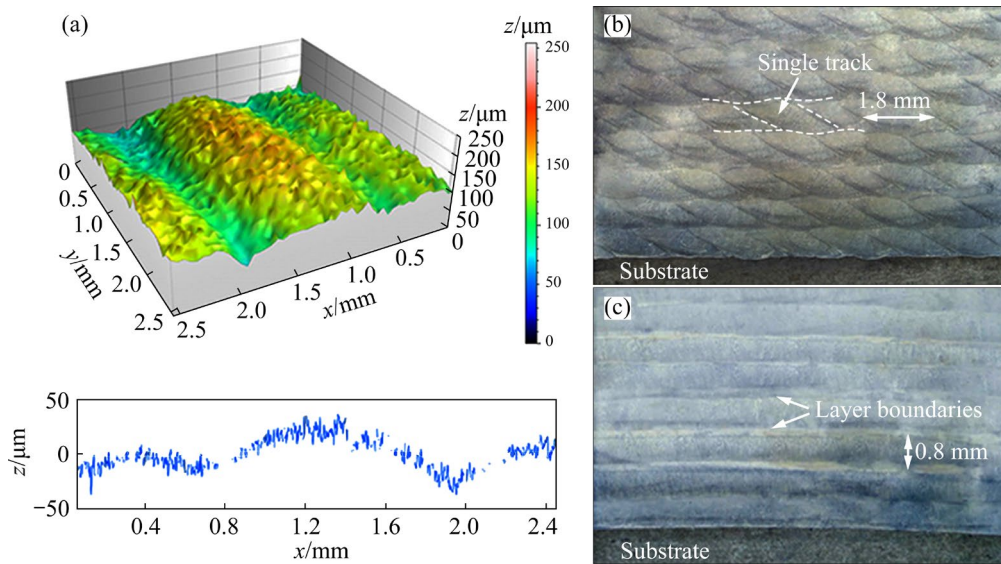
Macro-morphologies of HW-LMD Inconel 625 components: (a) Surface appearance; (b) Transverse section; (c) Longitudinal section
